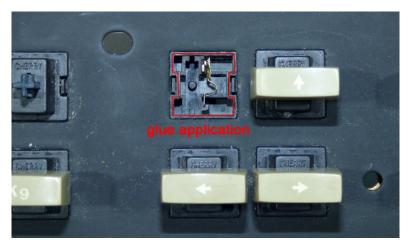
A thin thread of epoxy can be applied to the outer rim of the case and then the upper part including the plunger can be inserted carefully. Make sure that the small helical spring is in place (not yet installed on its pin in this picture) and that the pin on the plunger engages properly into the spring.
